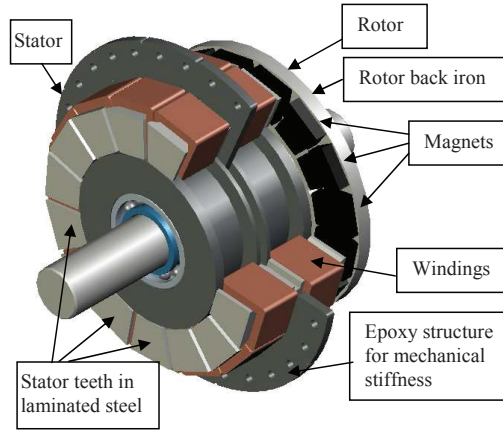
AFPMSM with two rotors on both sides of the stator (front rotor removed for clarity) [7].
